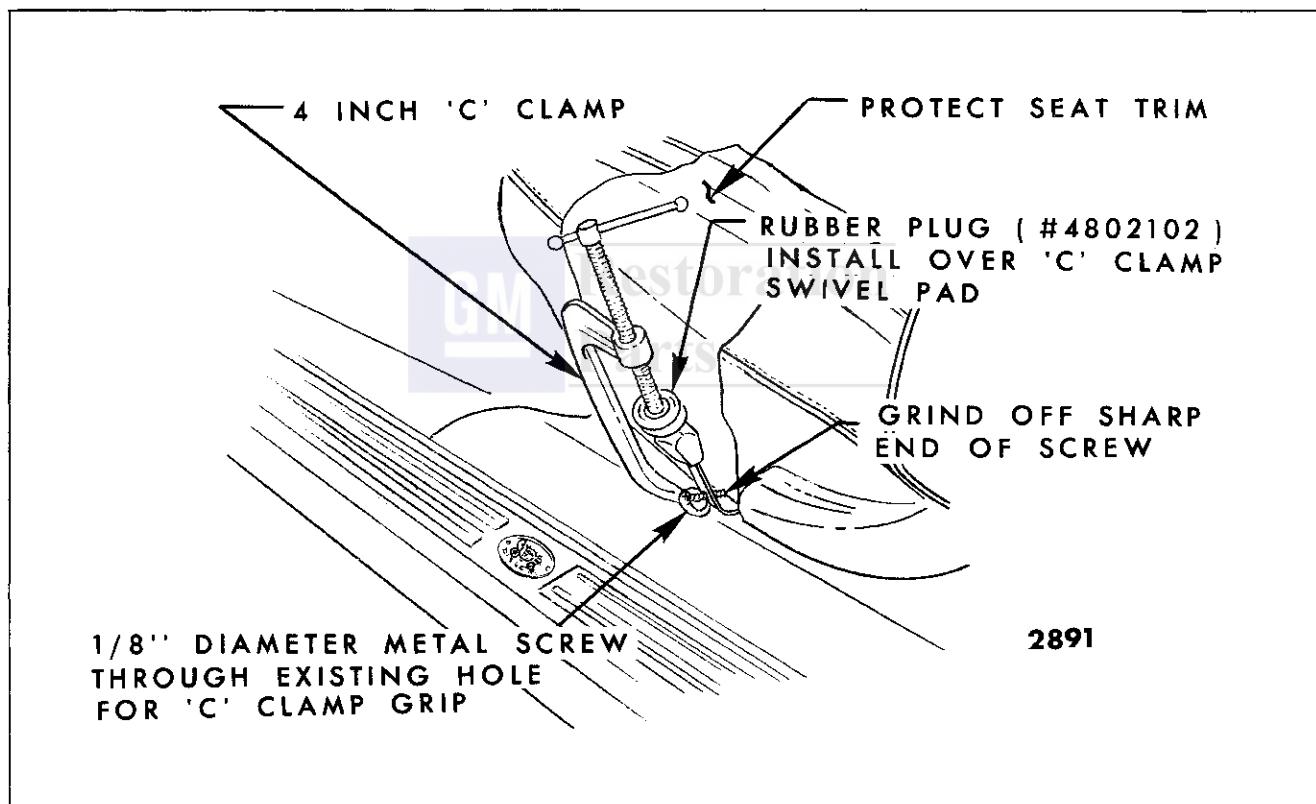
Front Seat Adjuster Control Knob - Installation
